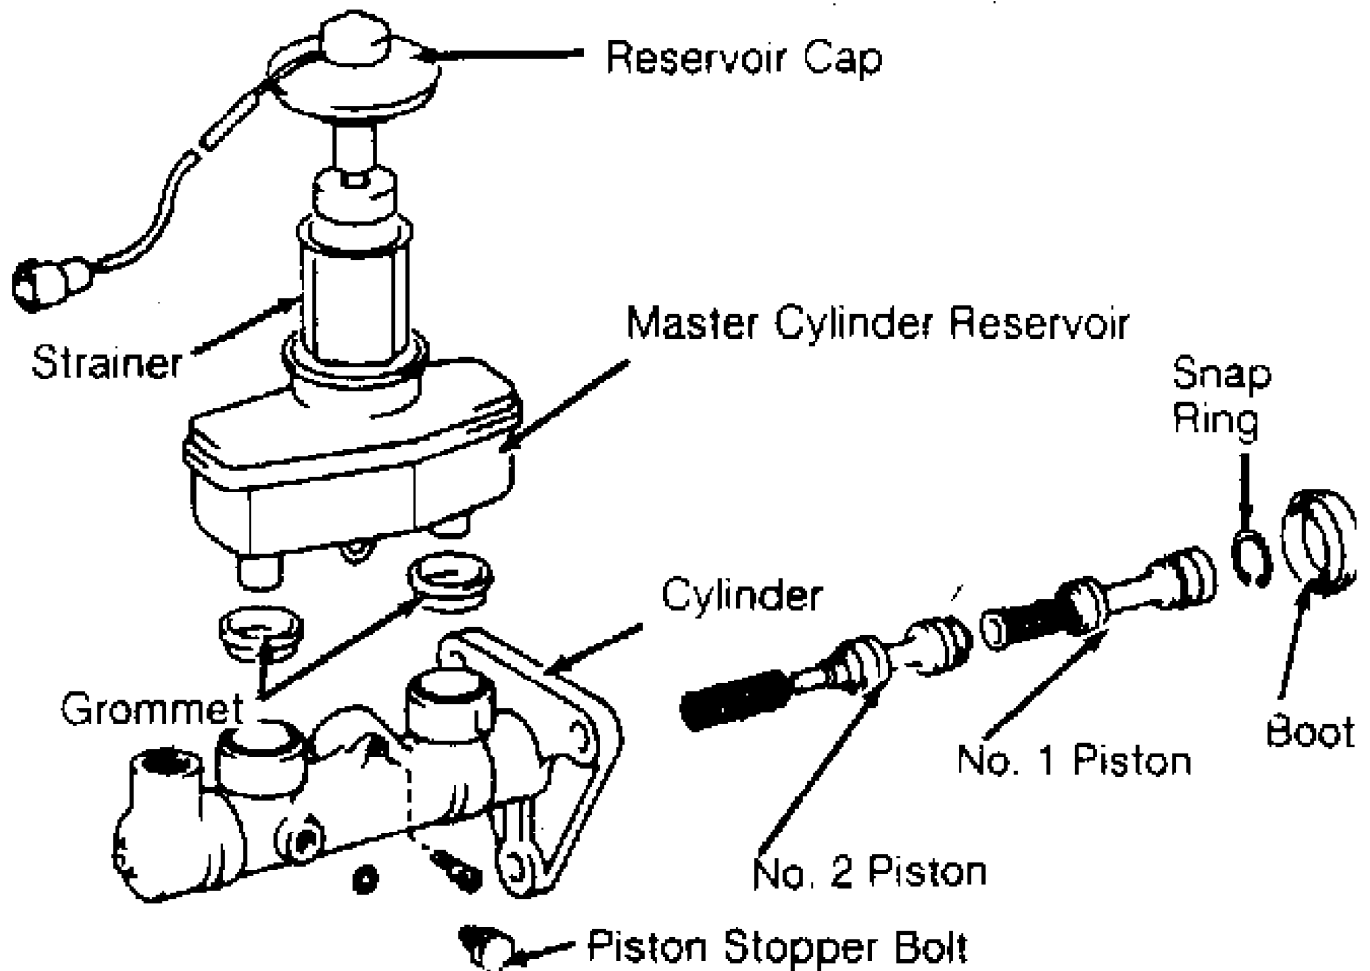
Exploded View Of Master Cylinder Assembly (Typical)
